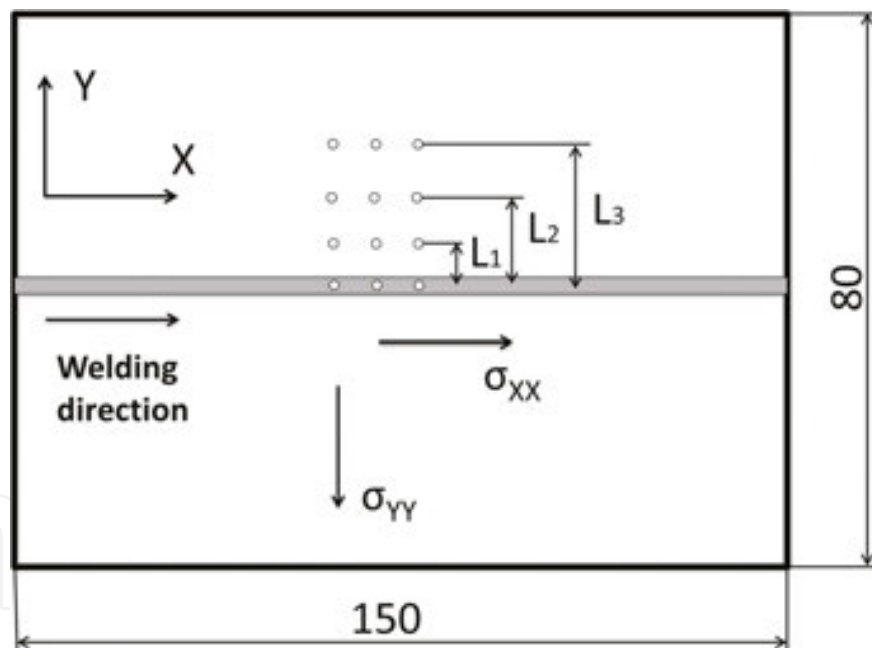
Geometry of welded plates and locations of drilled holes for residual stress measurements.
